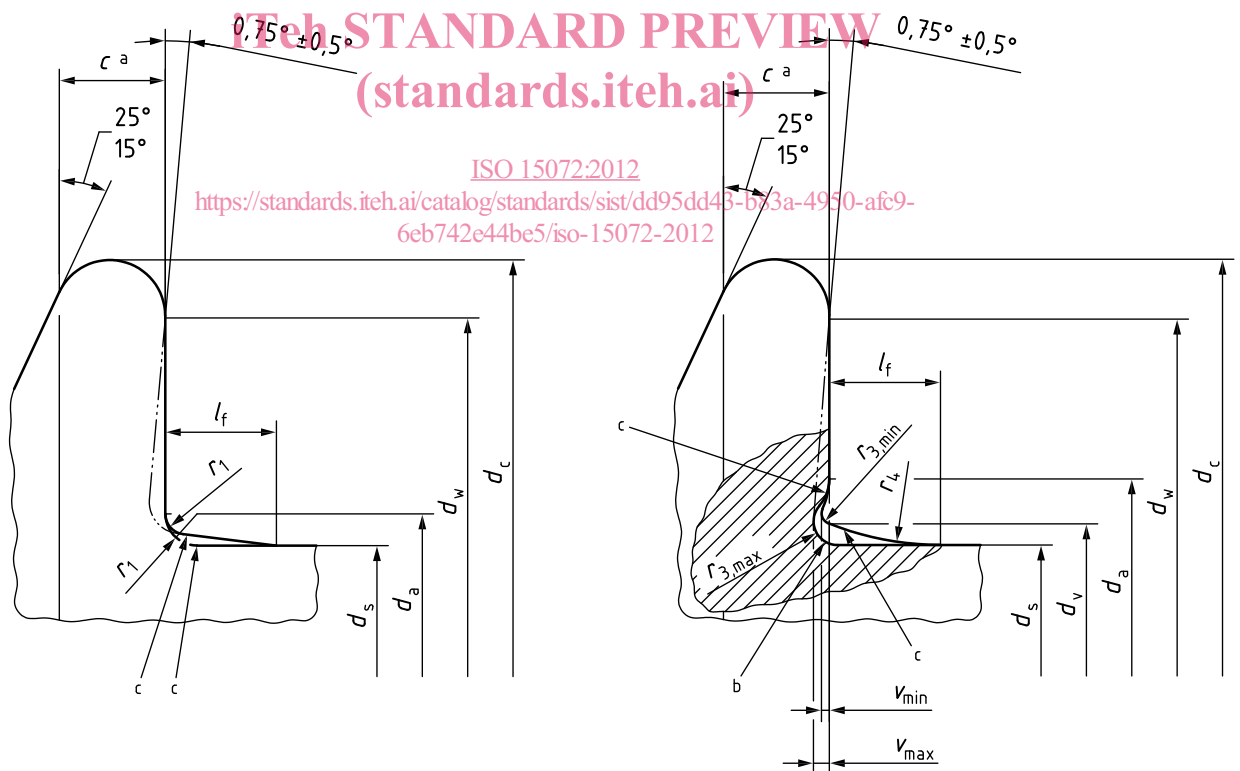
Hexagon bolt with flange — Full shank — Standard type
